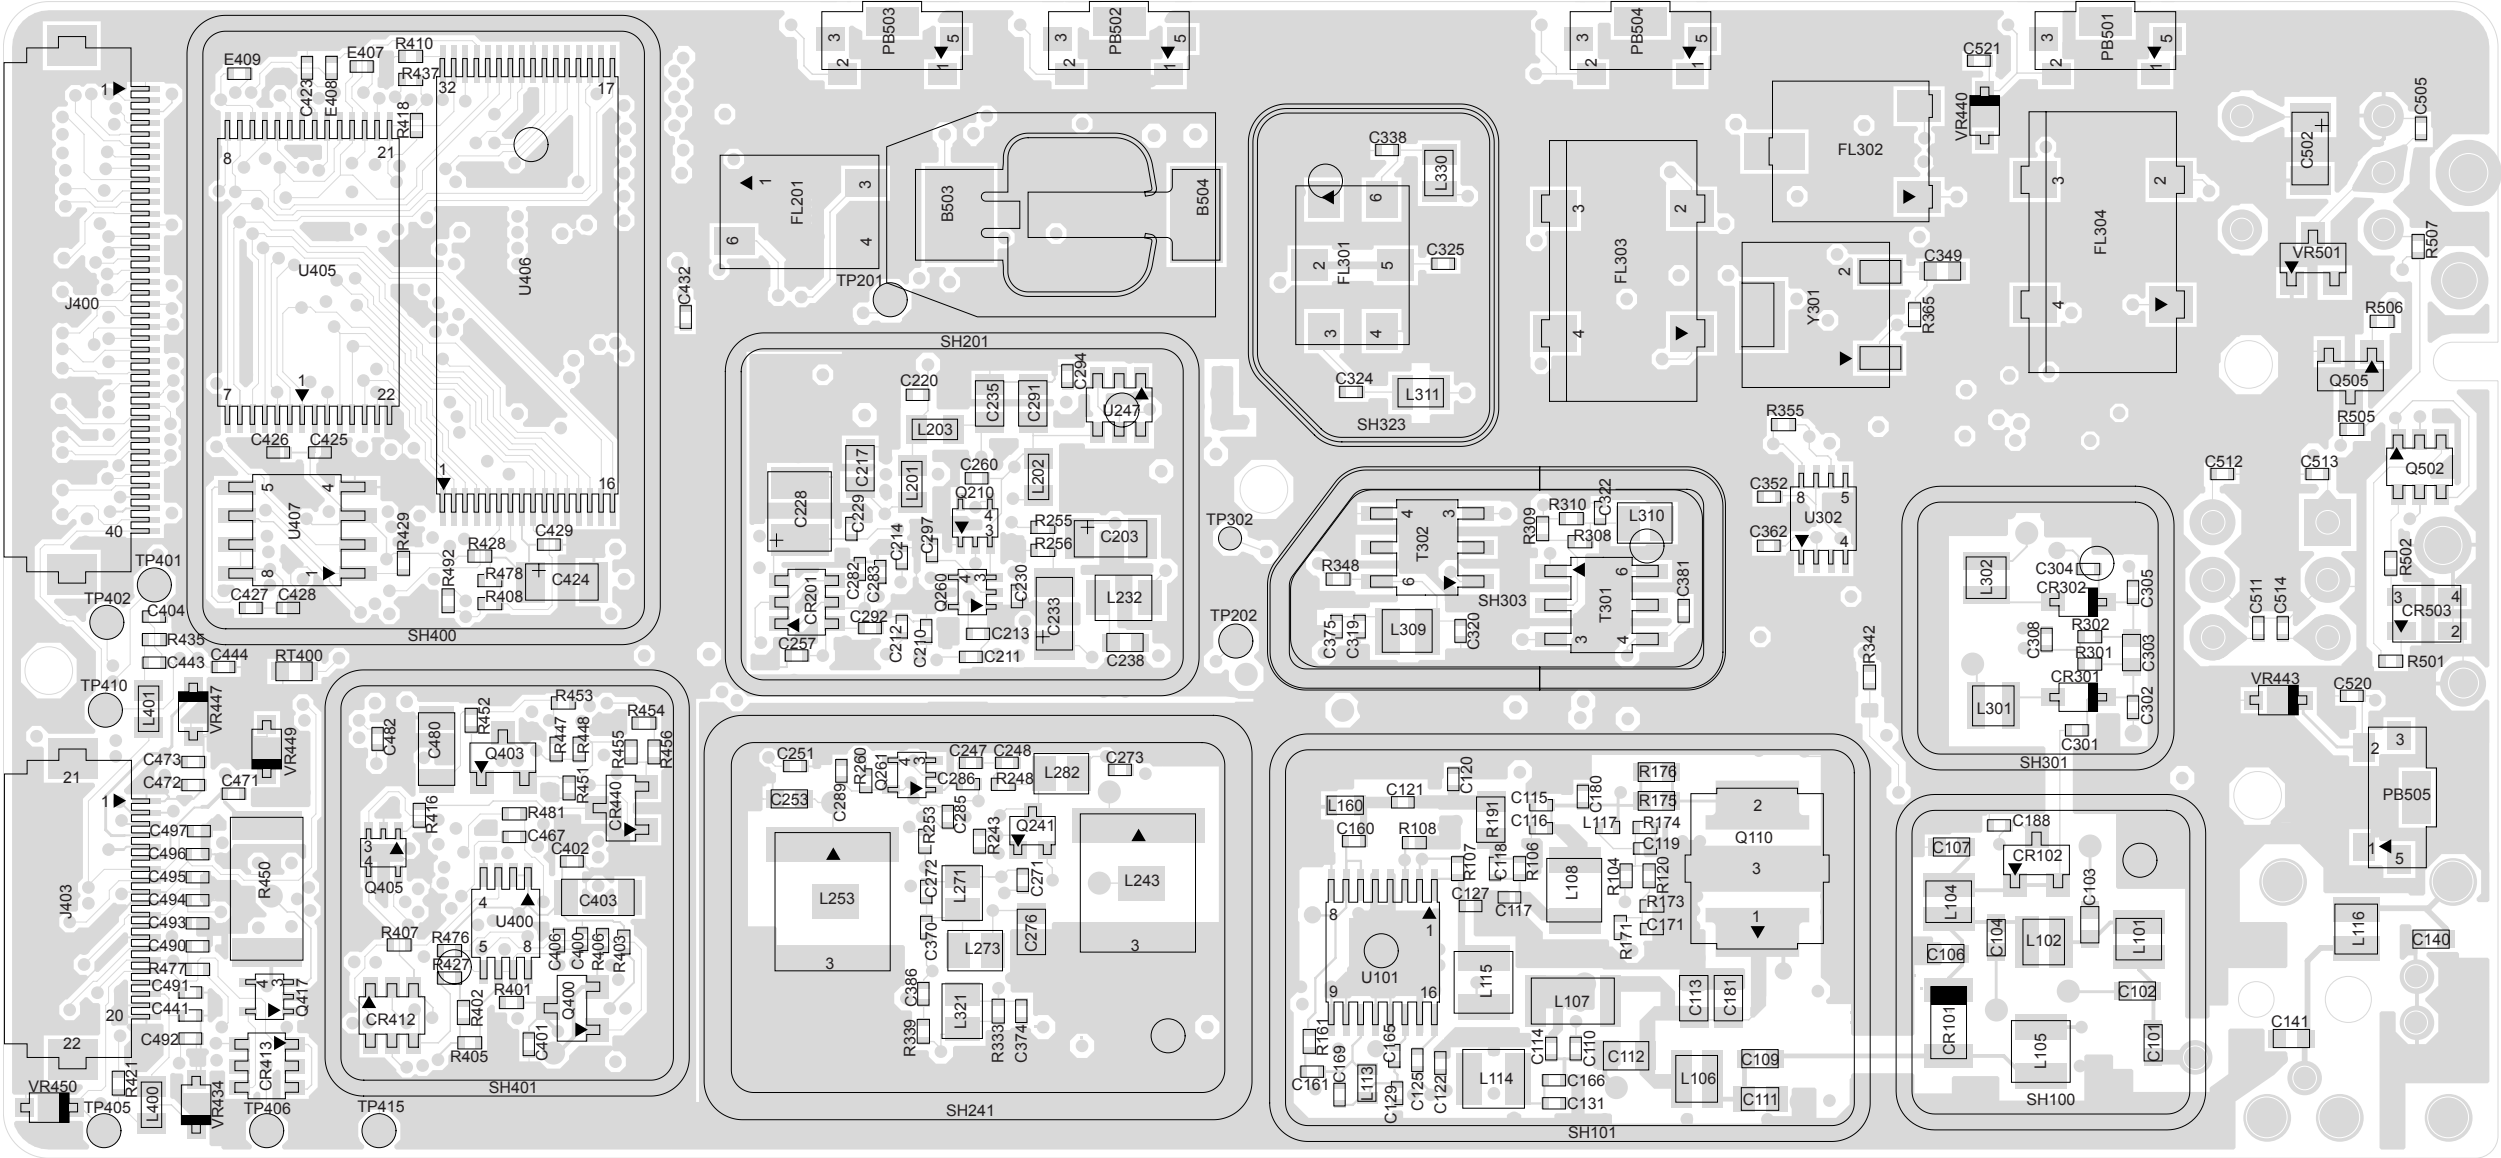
UHF (450–512 MHz) Main Board Top Side PCB 8486686Z02 rev. A
